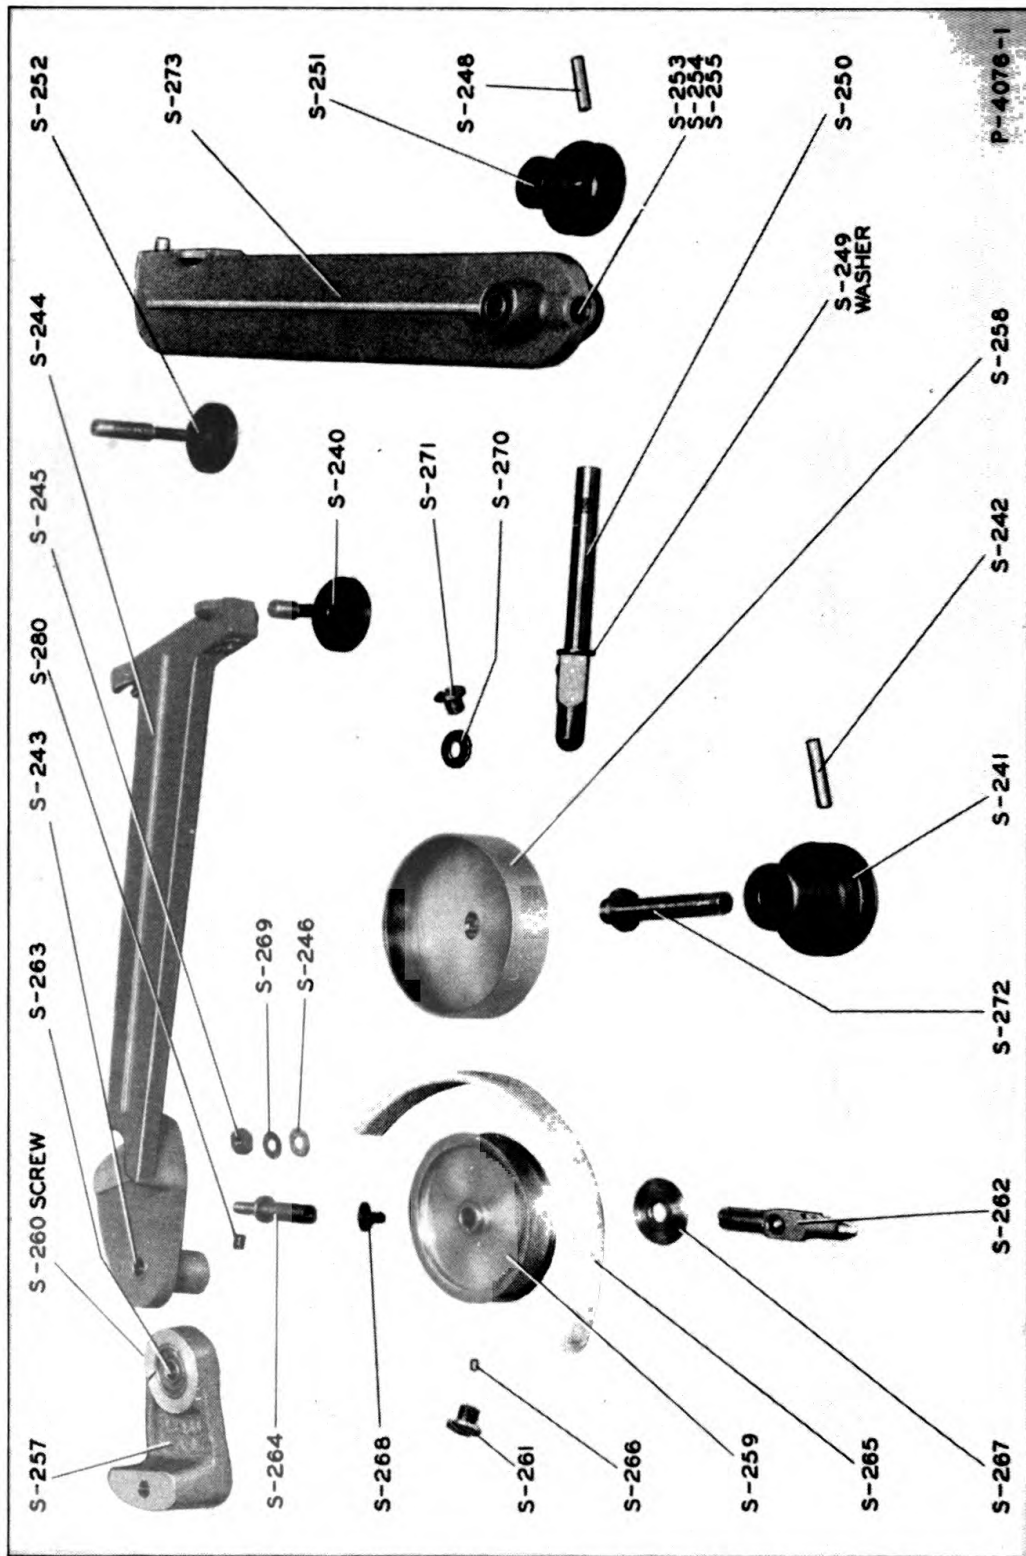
Takeup and Rewind Reel Arms—Disassembled—Parts Identification
